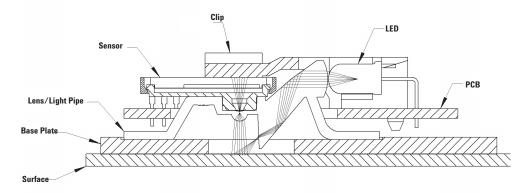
Sectional view of PCB assembly highlighting all optical mouse components (optical mouse sensor, clip, lens, LED, PCB, and base plate).
